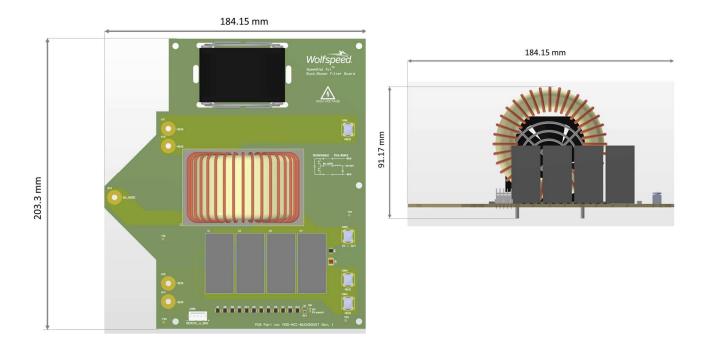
DIMENSIONS OF THE BUCK/BOOST FILTER BOARD
